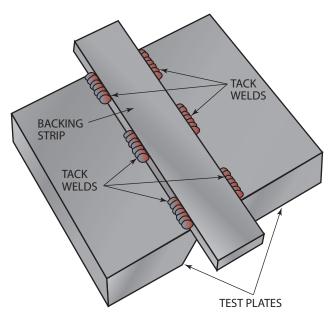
Securely tack weld the backing strip to the test plates.
